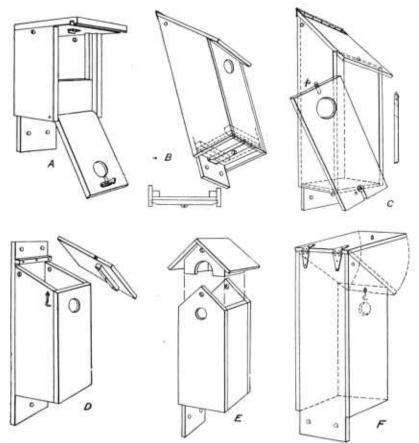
Accessible nest boxes. A, llinged front held up by a catch; B, removable bottom, released by the slight turn of a cleat; C, swinging front, held in place by the pin p and by tightening the screw s; D and E, removable tops; F, hinged top
